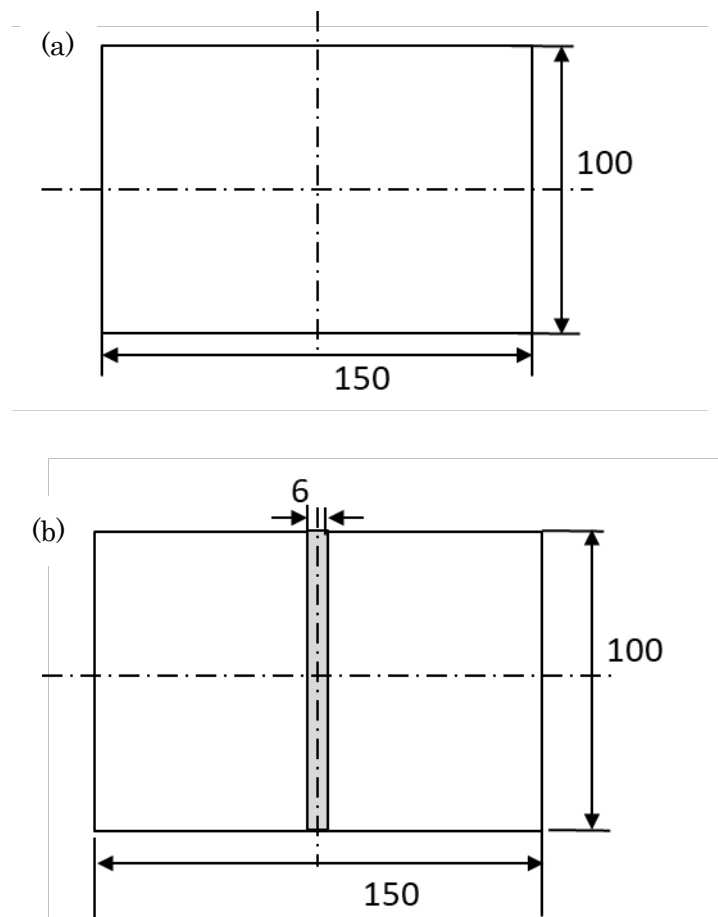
Geometry of specimen (a) Base material specimen, (b) FSW specimen
